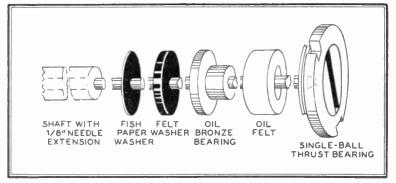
EXPLODED VIEW OF OIL-LESS BEARINGS USED IN CARTER DYNAMOTORS
